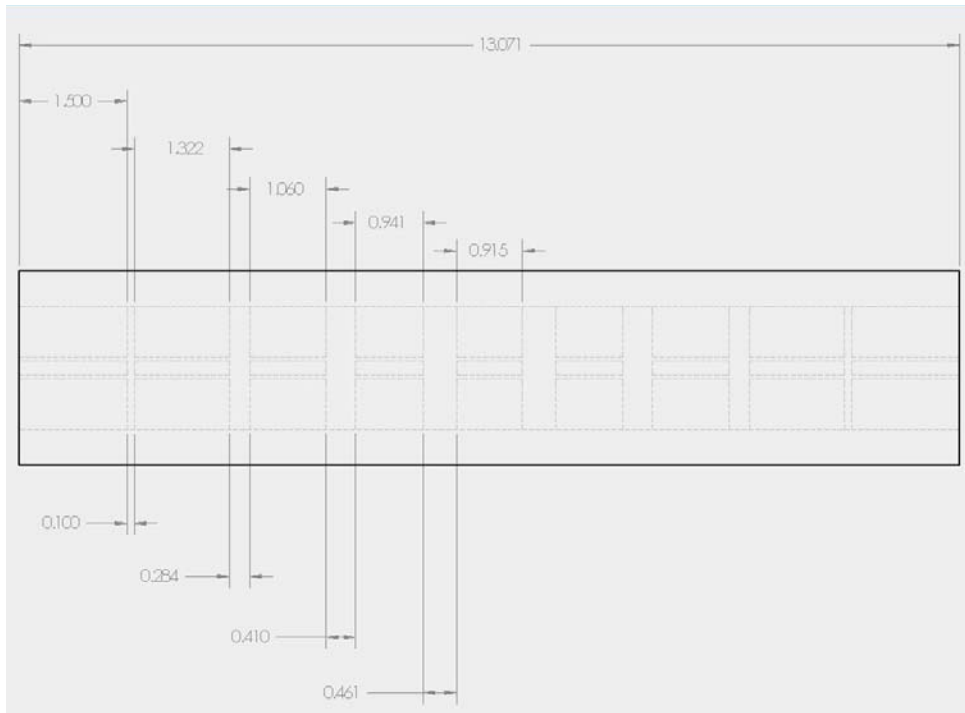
Technical drawing, longitudinal view of the 7-pole filter (dimensions in mm).
